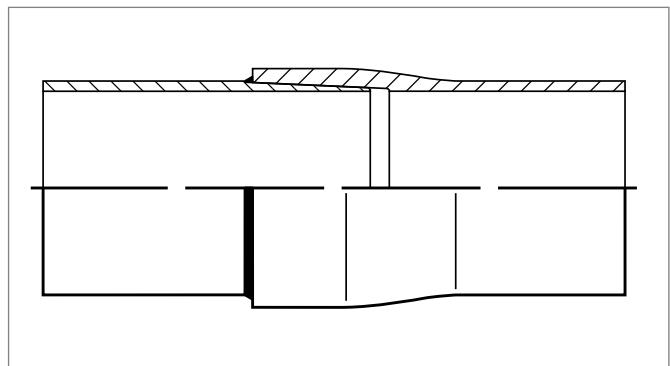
b. Taper-Taper adhesive bonded joint
